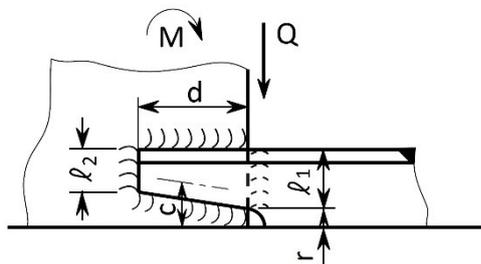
Profile joined by means of two flank and two frontal fillet welds (all round welding)
